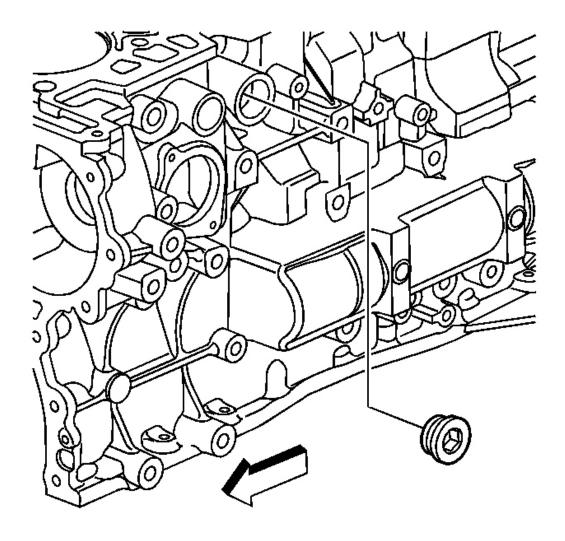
View Of Engine Block Coolant Plug Courtesy of GENERAL MOTORS CORP.
